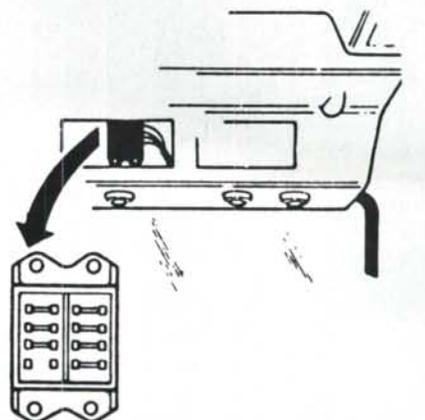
On models equipped with cab, fuse holder is located on right-hand side of roof panel.
